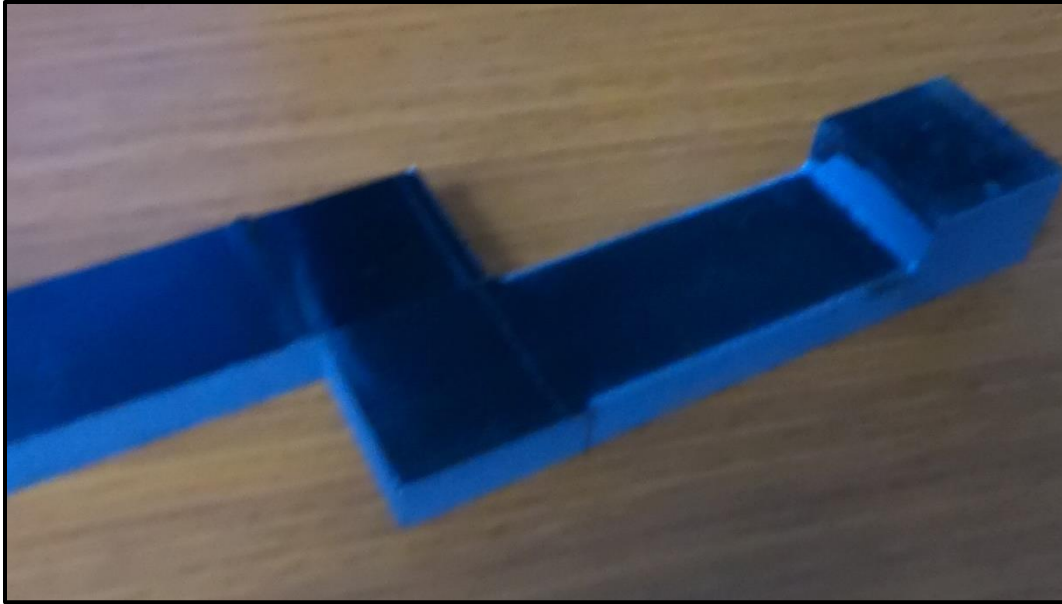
Failed Test Specimen – Complete Bond Line Failure
